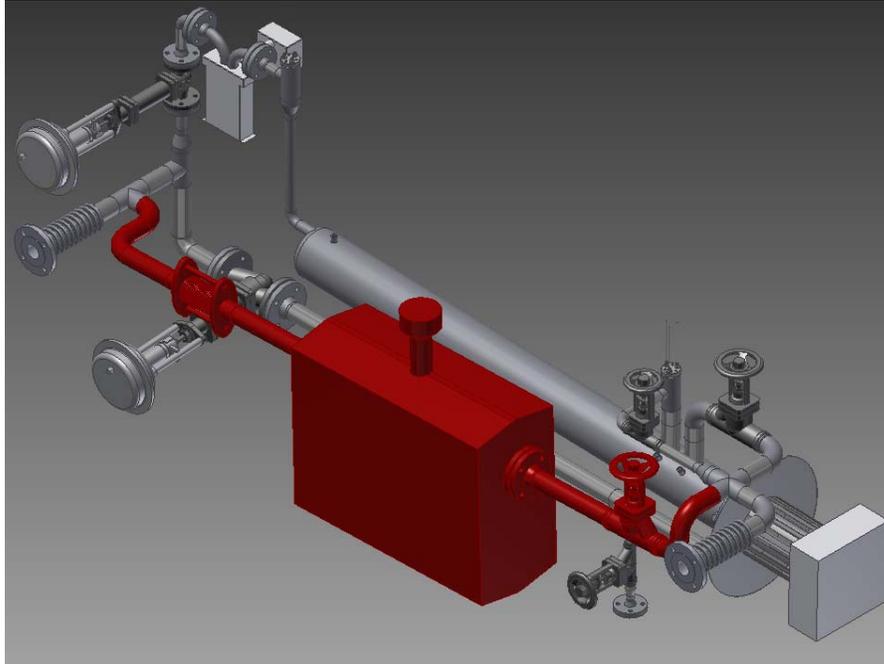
3D view of the bypass facility without insulation. New tube section and Coriolis sensor highlighted in red
